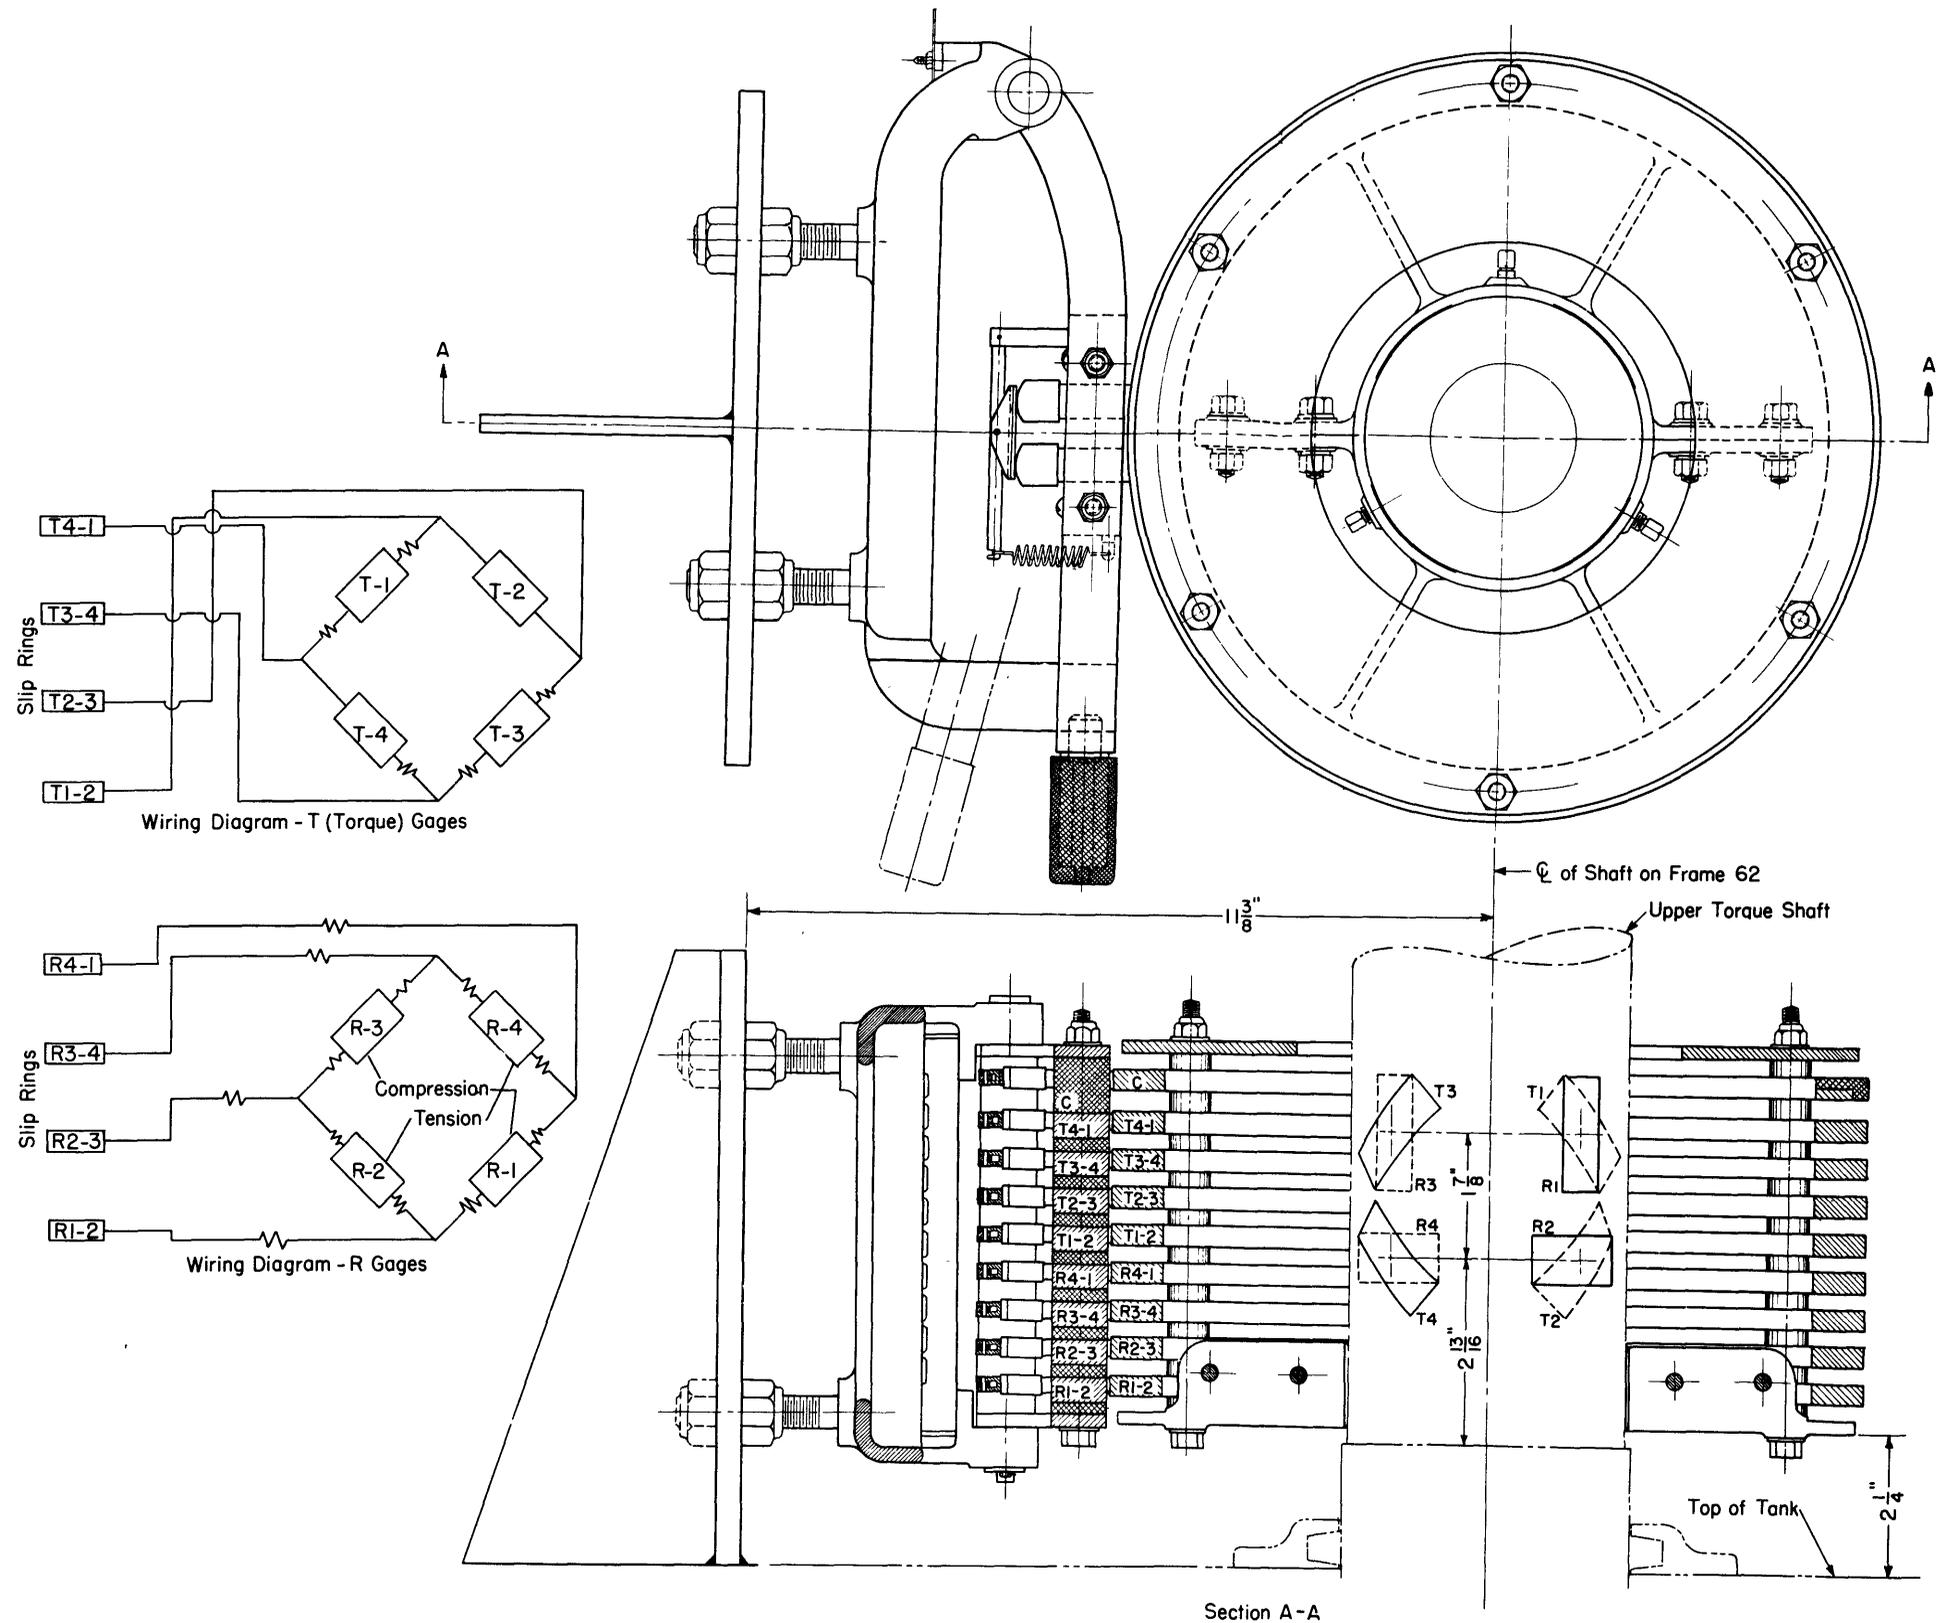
Strain-Gage Arrangement and Slip-Ring Assembly for Measuring Torque and Thrust on an Impeller Shaft
